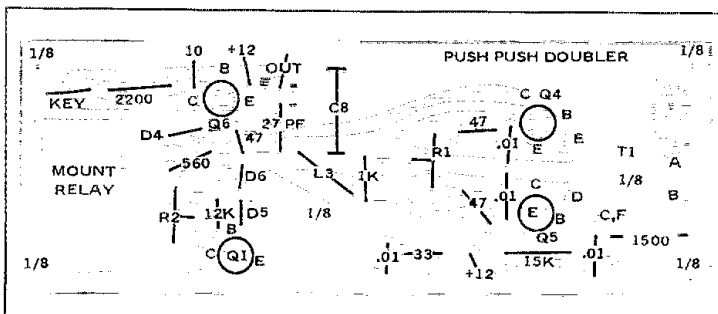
Scale layout and parts placement for the doubler/break-in delay board. View is from the component side of the board. Etching patterns for all circuit boards in this series will be published with Part 3; 1/8 indicates a 1/8-inch hole.
